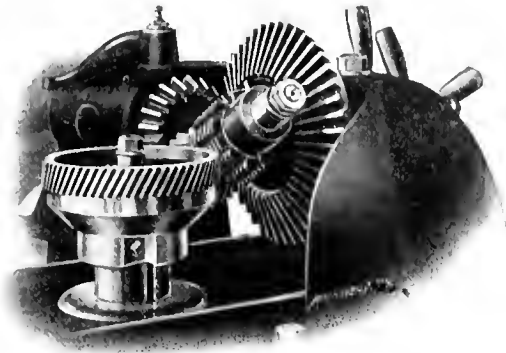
Grant-Lees Machine hobbing a Helical Gear.
